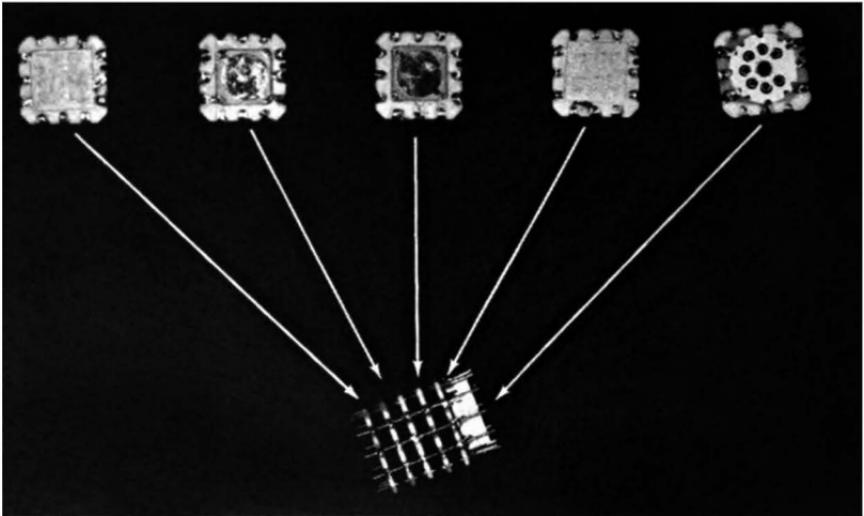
Component parts of a module. Wafers contain tube socket, capacitors and resistors. Courtesy National Bureau of Standards.
